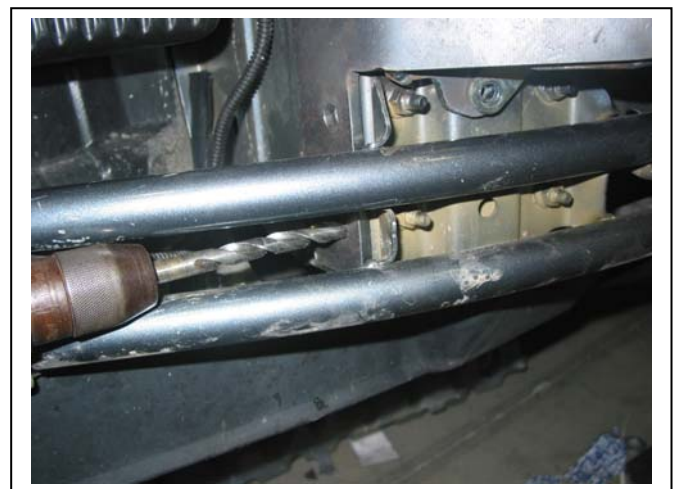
Driver's side shown. Use long 10mm drill bit as required.
